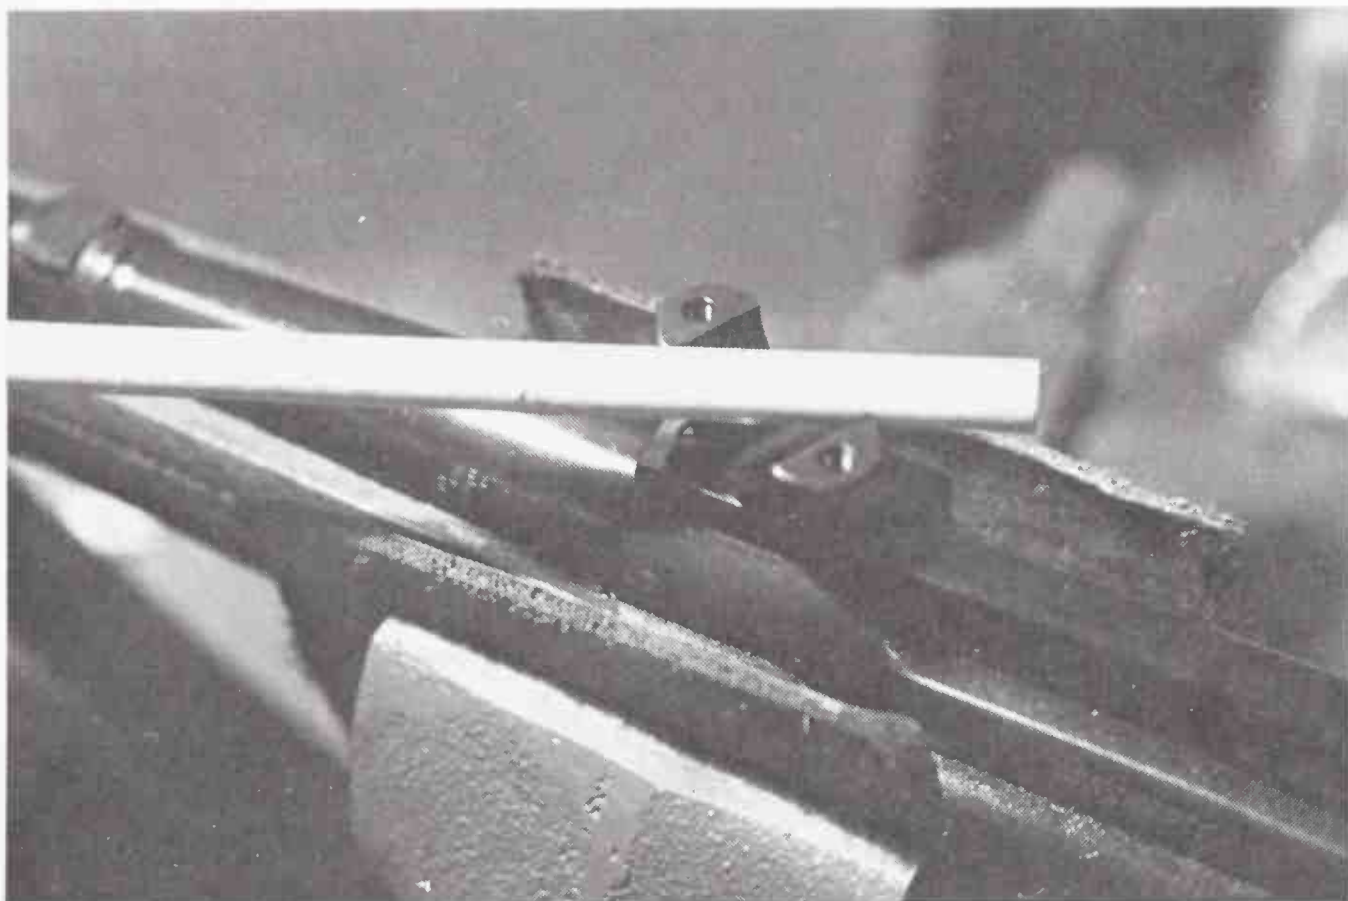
A wooden dowel being used to twist the front mounting ring into position. Until the metal-to-metal contact between the ring and the base gets broken in, it is not a good idea to use the scope itself to twist these rings; you may damage the scope.
